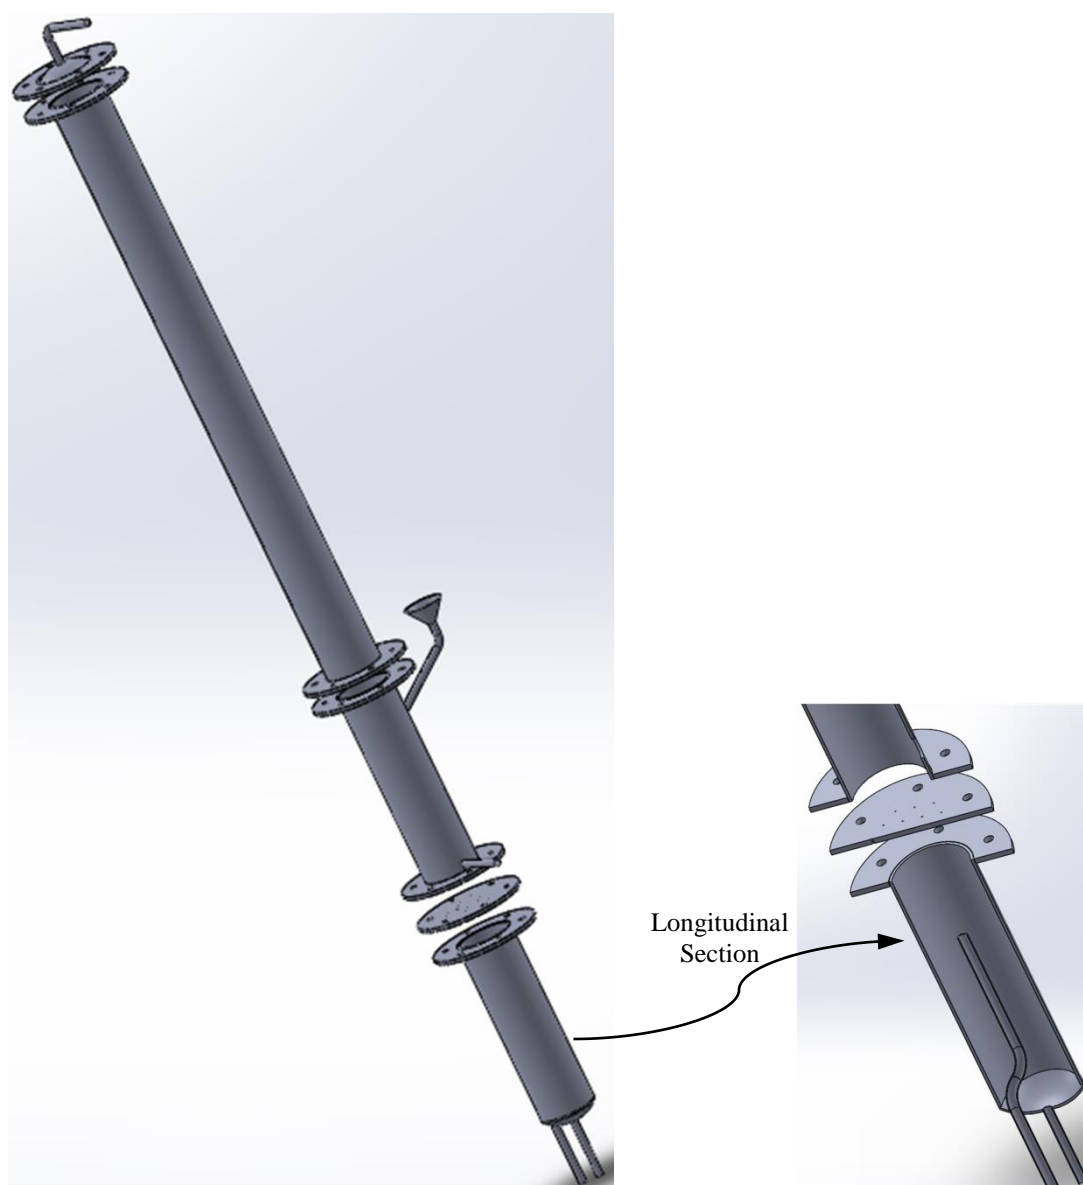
Geometry of the assembled fluidized bed gasifier
